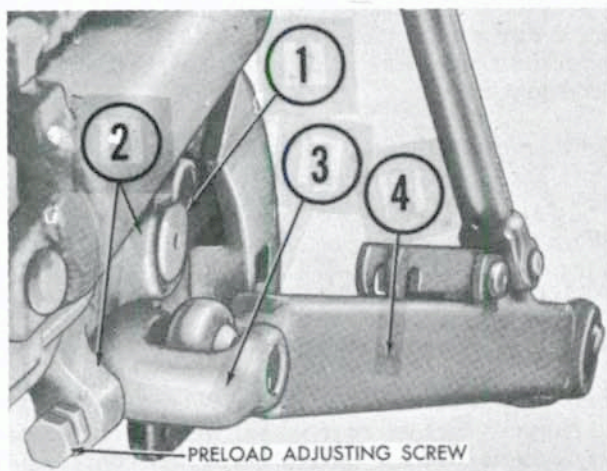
View of the torsion bar preload adjusting screw and locknut for Series IV D-17 tractors. Refer to paragraph 259 for adjustment procedure.
